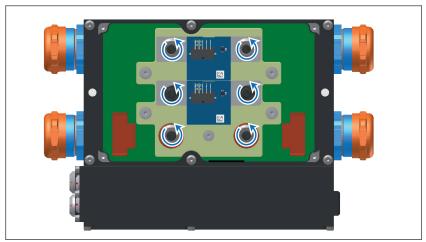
HV BM 1.2+S, lid removed from the housing
